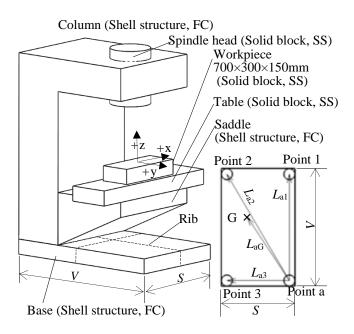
Schematic view of the machine tool structure for consideration of the behaviour during the physical earthquake model (SS: steel, FC: cast iron).
